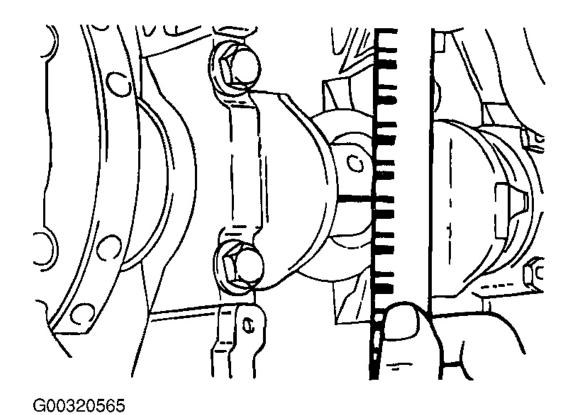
Measuring Bearing Clearance Courtesy of KIA MOTORS AMERICA, INC.
